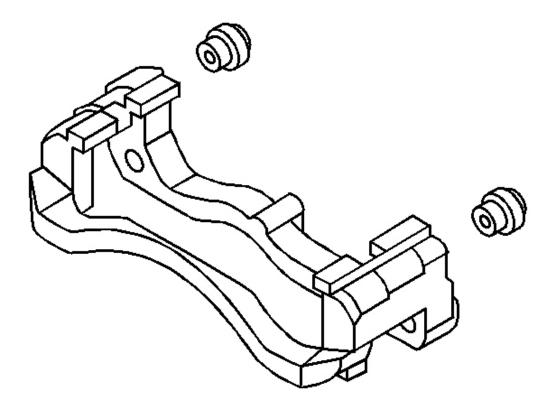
Removing/Installing Caliper Bracket Bushings Courtesy of GENERAL MOTORS CORP.
